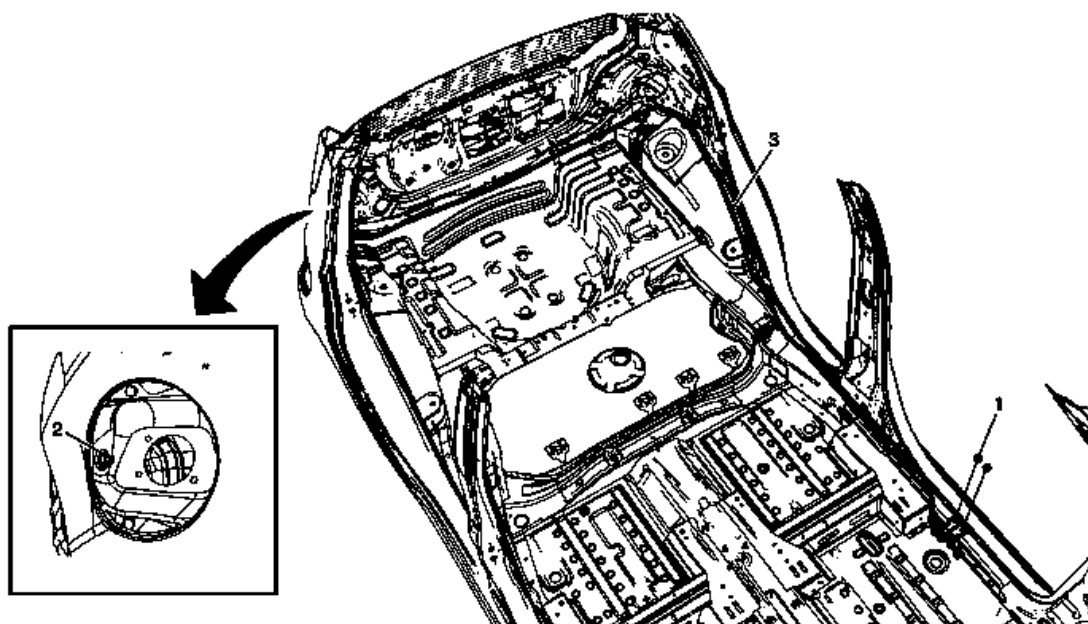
Fuel Tank Filler Door Latch Release Cable
